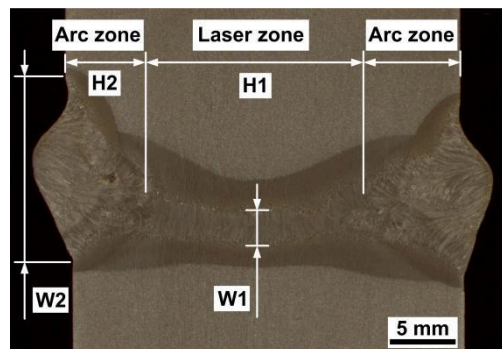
Inhomogeneous dimension of joint welded using double-sided hybrid laser-arc welding.
